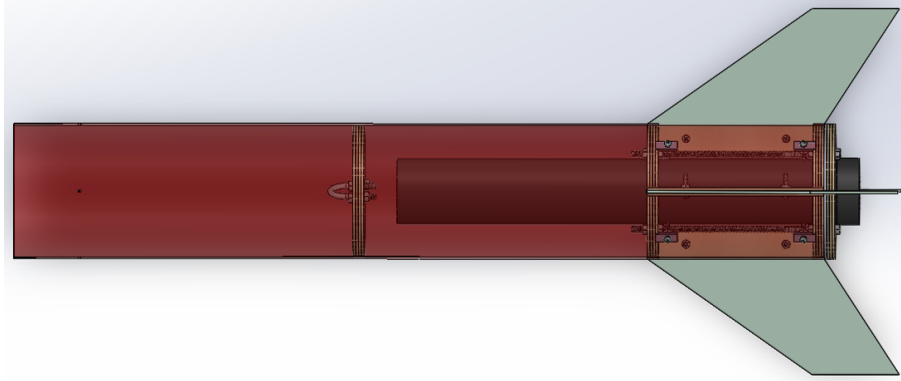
CAD model of the drogue parachute bay/fin can with removable fin system and motor installed.
